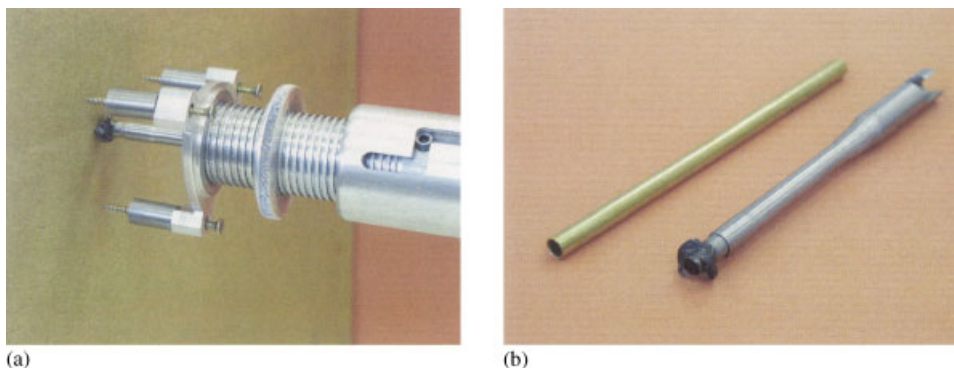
Core drilling device with the core drill for extraction of 4.8-mm diameter specimens
